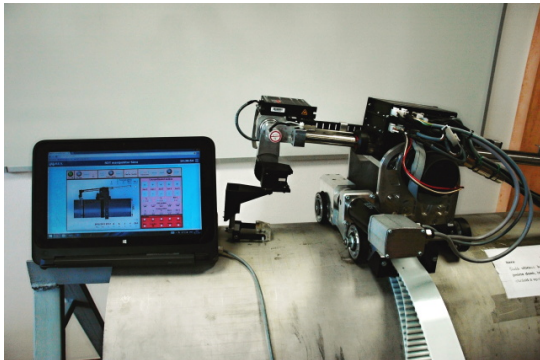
Laboratory set up of robotic manipulator SAVA for NDT of complex welds
